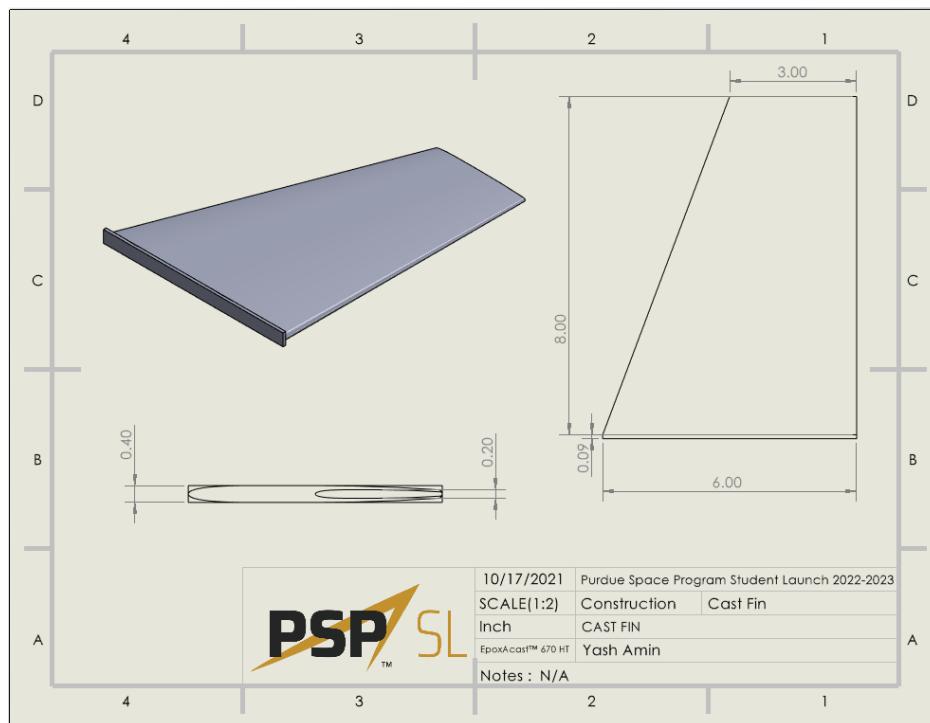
Technical Drawing for Fin
